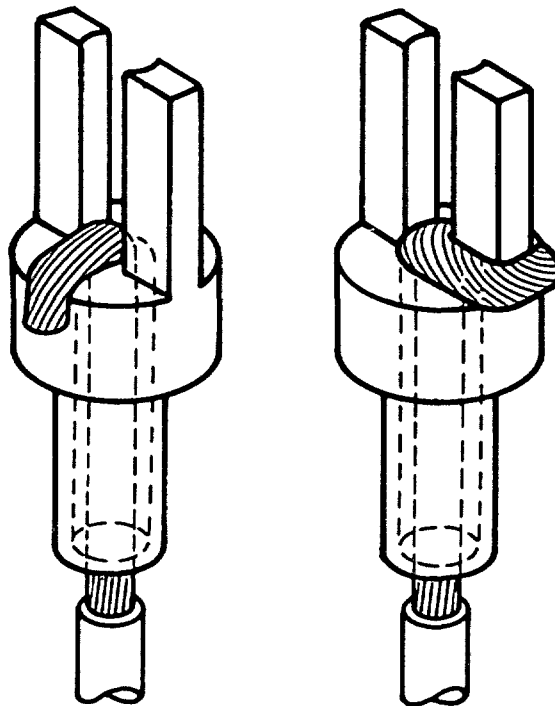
Bottom route terminal connection (see 5.1.3.6.2).
